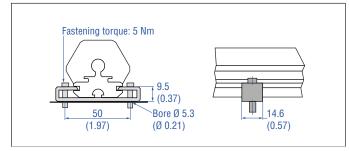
Mounting clamps (part no. 400 802) with cylinder screw M5×20
